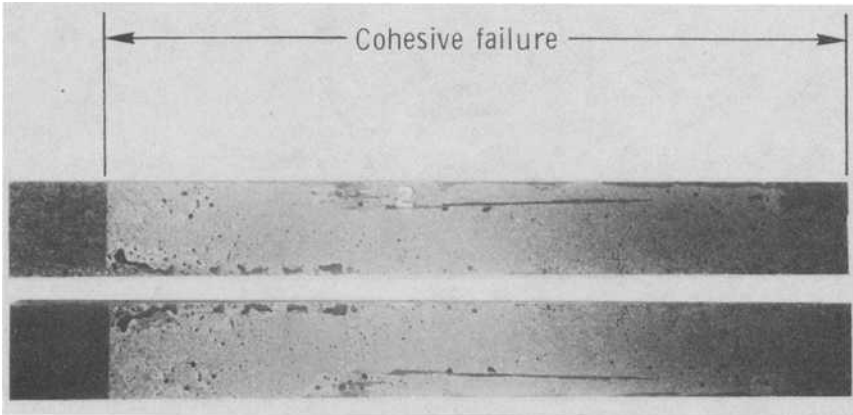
Debonded surfaces of DCB specimen with EC 3445 adhesive.
